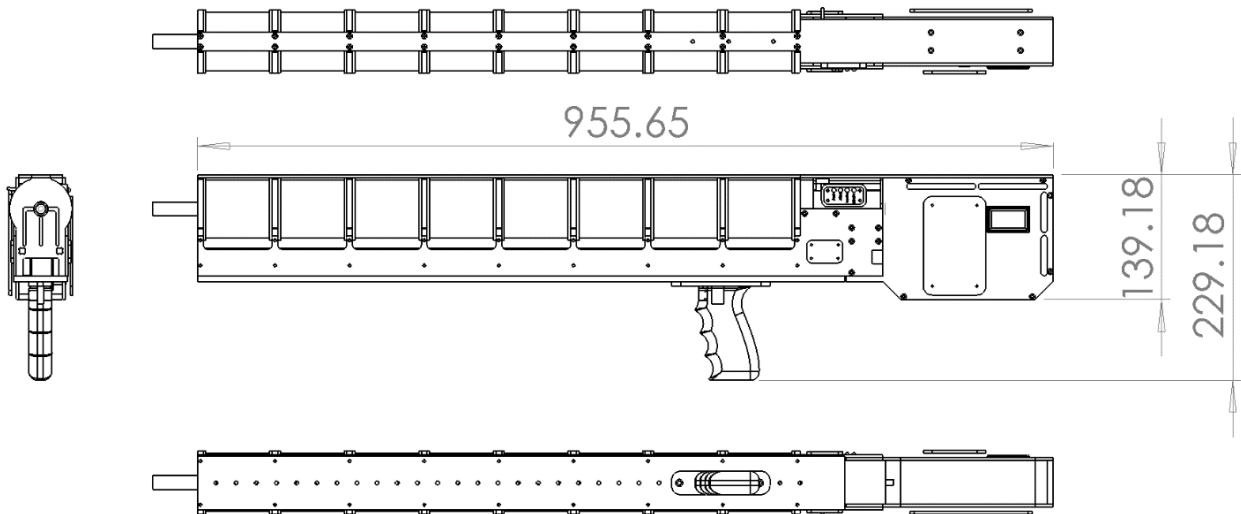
HSCG19 with bounding box dimensions, indicated with and without pistol grip installed. Optics removed.
